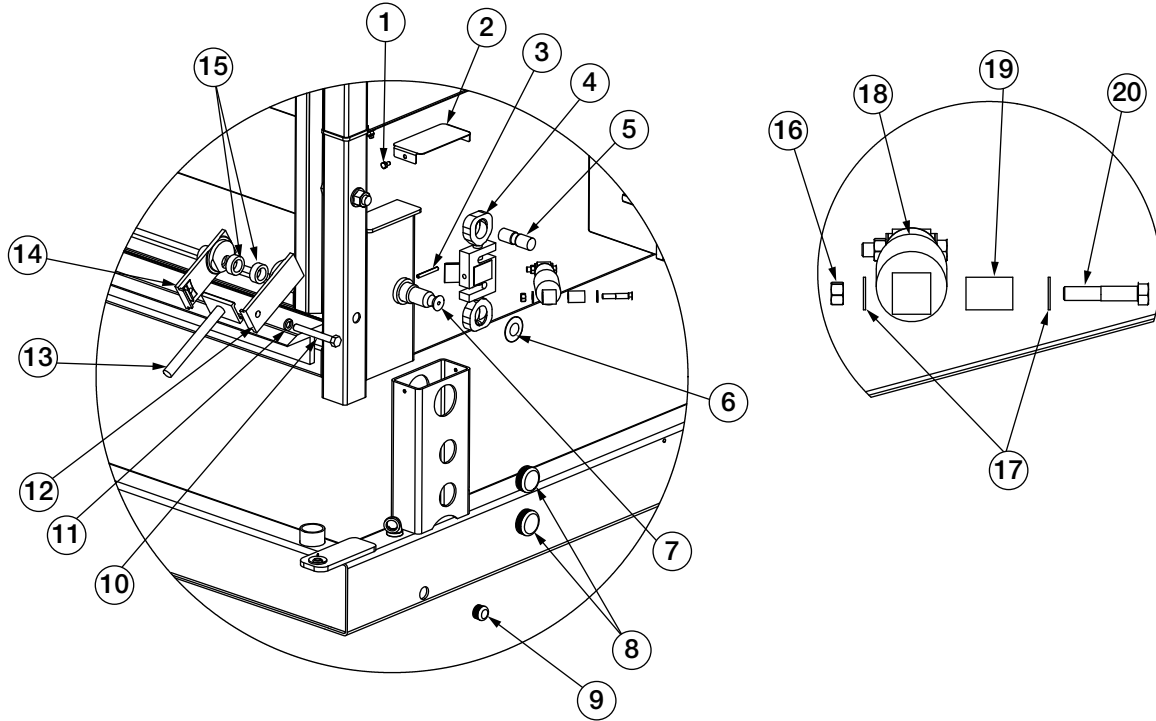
MAS-P Lift Mechanism Detail Parts Illustration.
